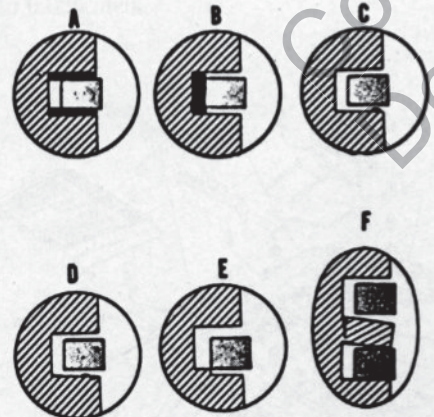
Examine piston for damage before removing old rings. Shown are some common faults.
